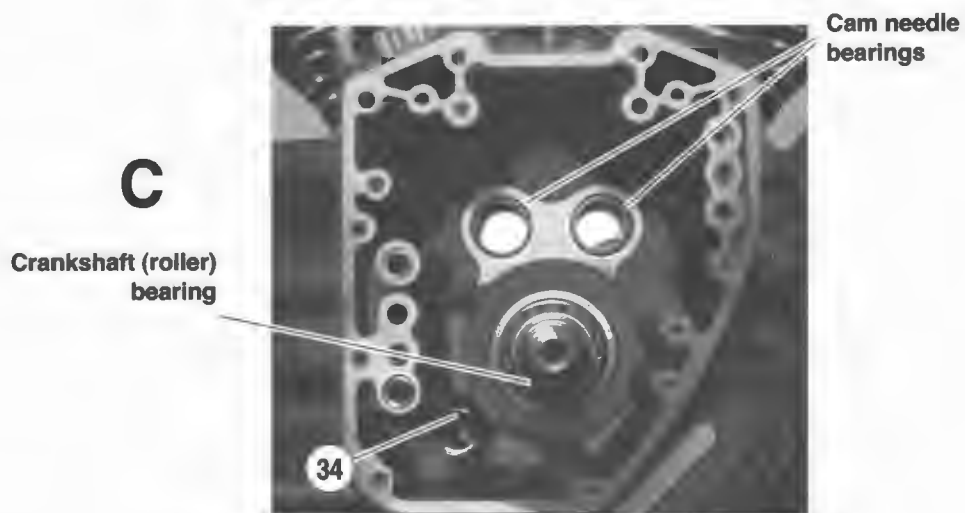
Engine Oil Flow: Cam Support Plate/Right Crankcase Half
